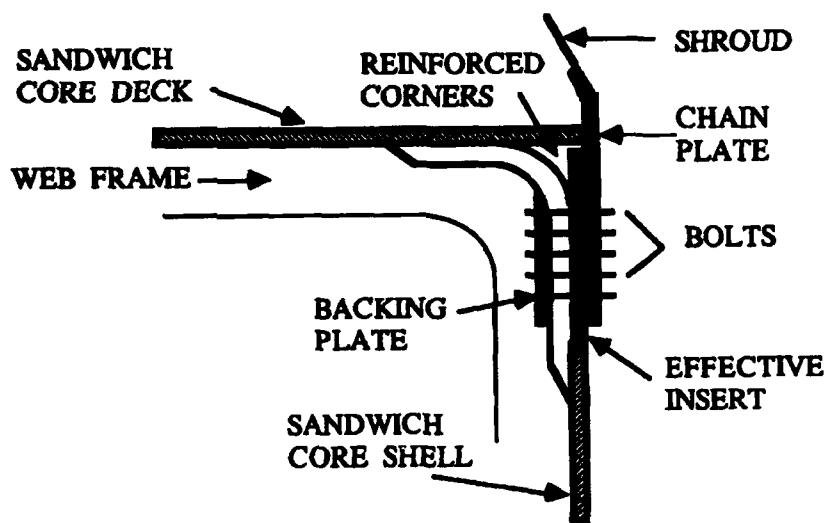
Typical Shroud Attachment to Side Shell with Sandwich Construction [USCG NVIC No. 8-87]
